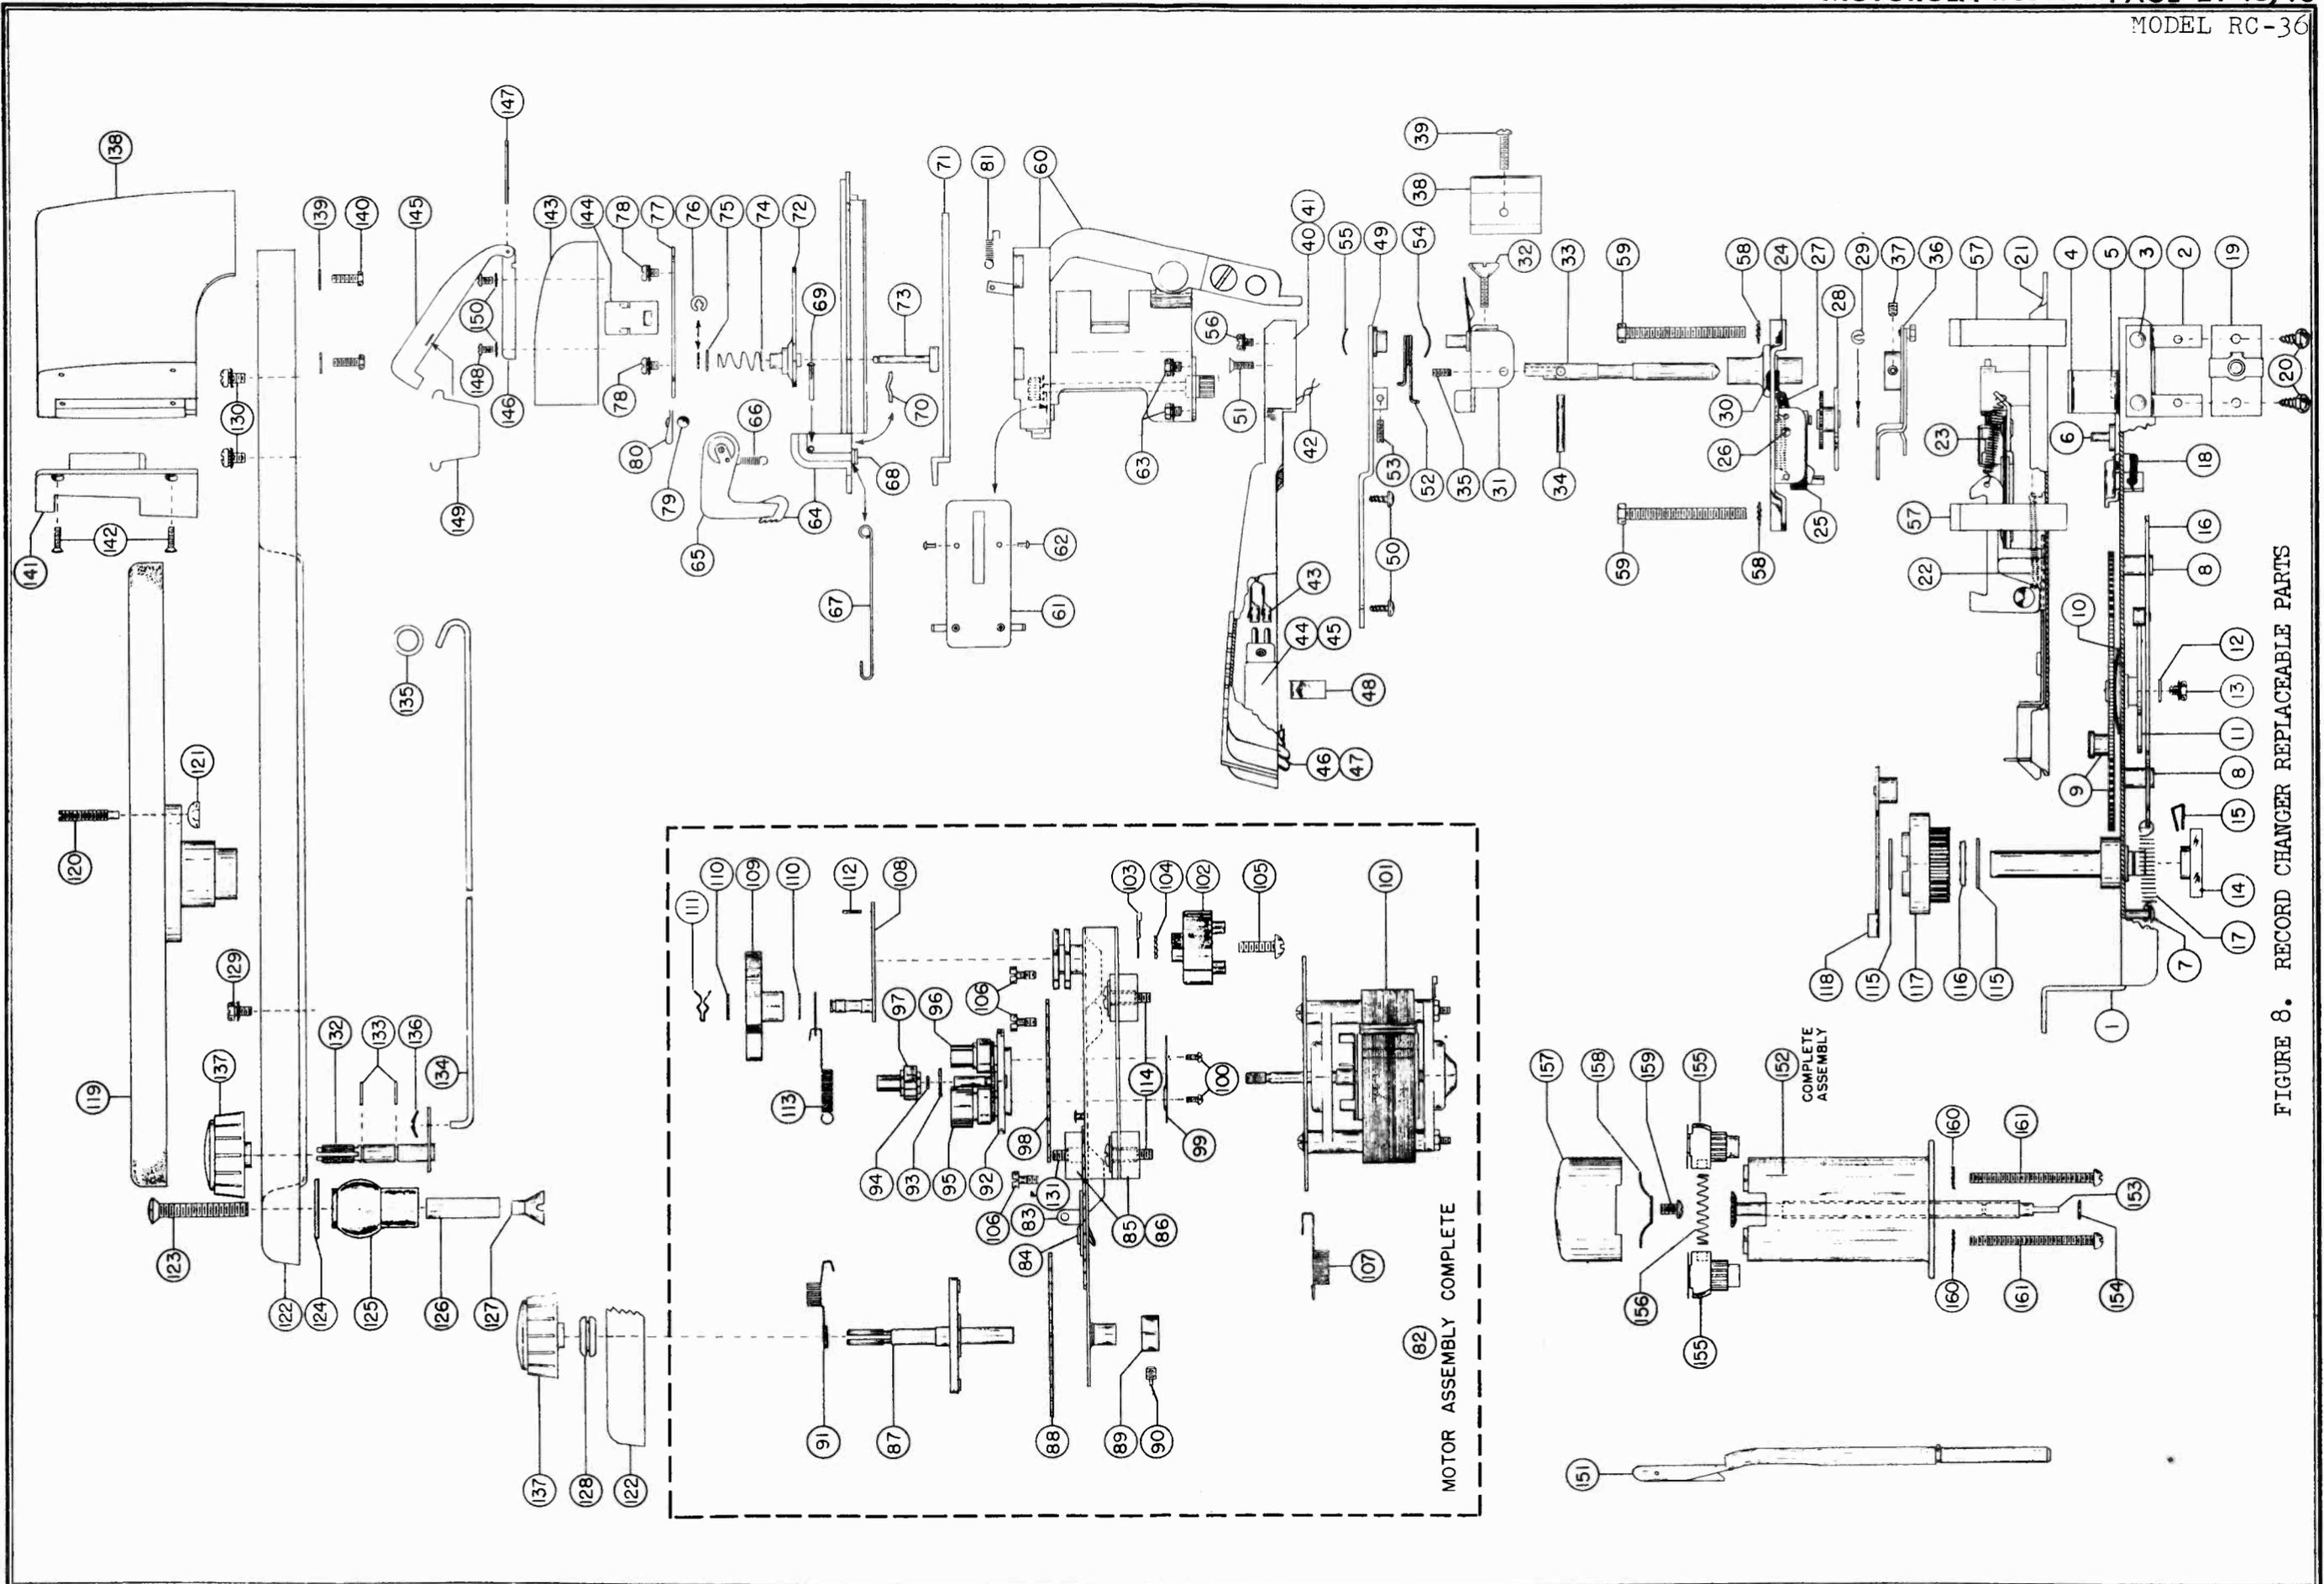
RECORD CHANGER REPLACEABLE PARTS
